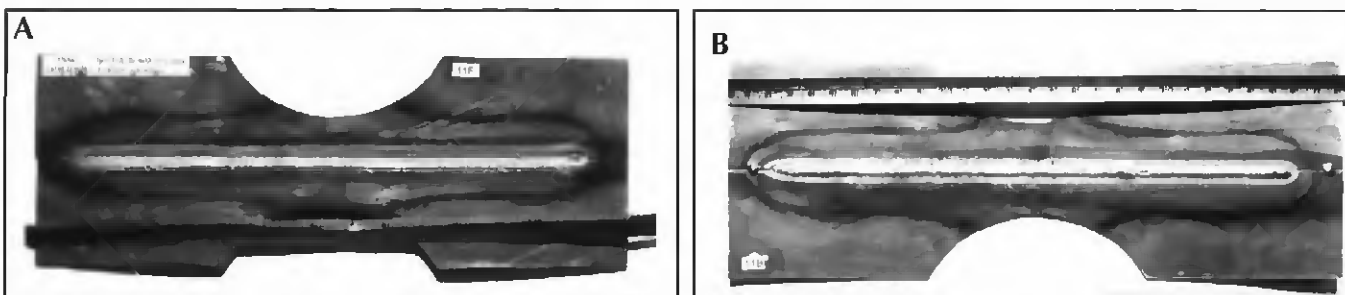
The dumbbell-shaped workpiece with the double-input and double-output intelligent controller. A — Topside; B — backside.
